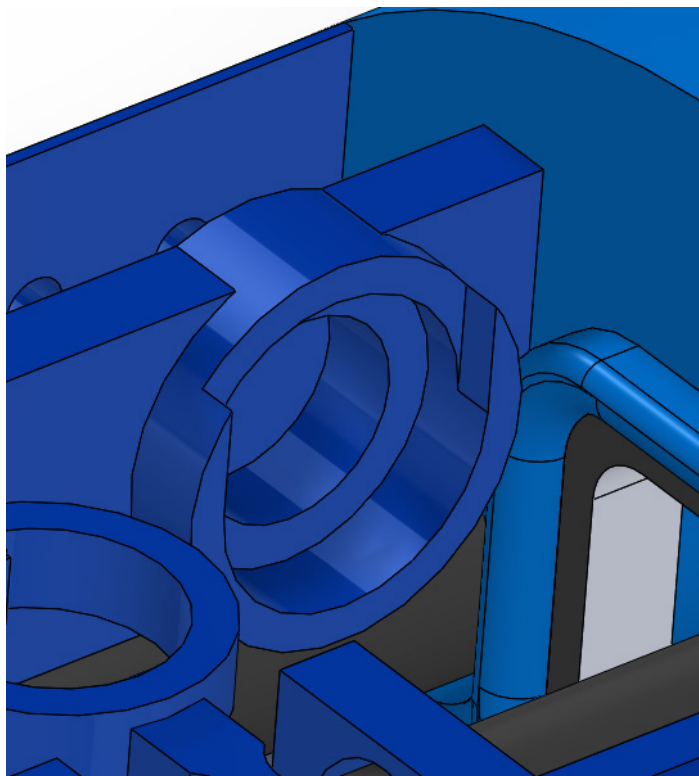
shows how the flexible tube is connected to the rigid body. The outside surface of the tube makes contact with the rigid body over 3 mm to prevent the connection to cause any air leakage. Also, the end of the tube is attached to rigid body for the same reason.
